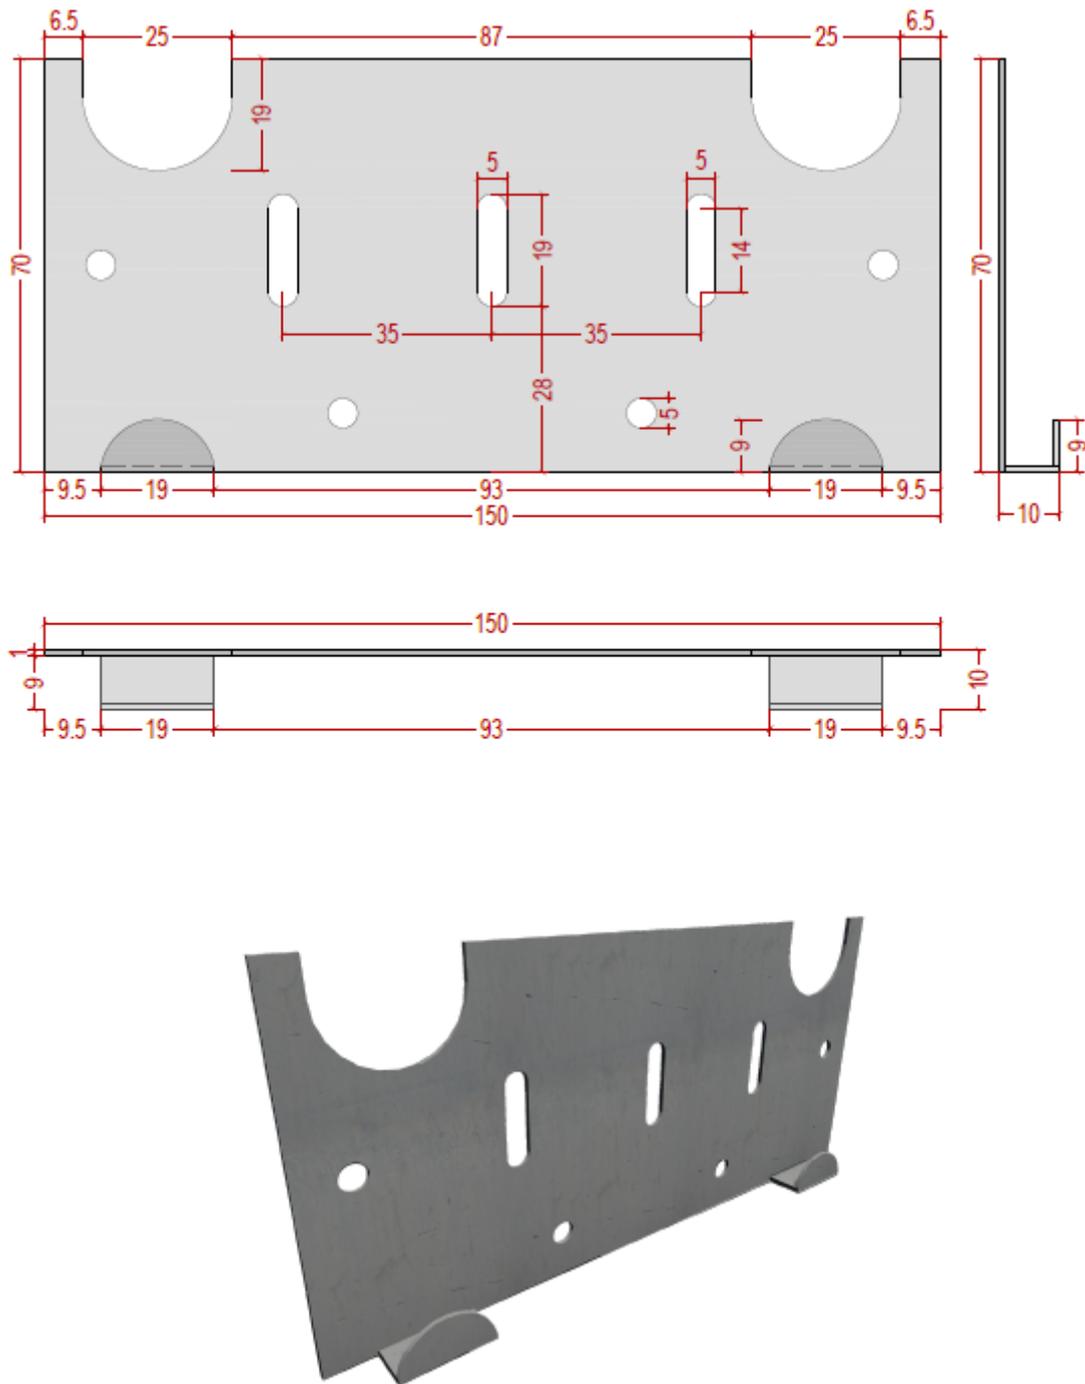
Technical drawing of the skin element fixing CRM.03
